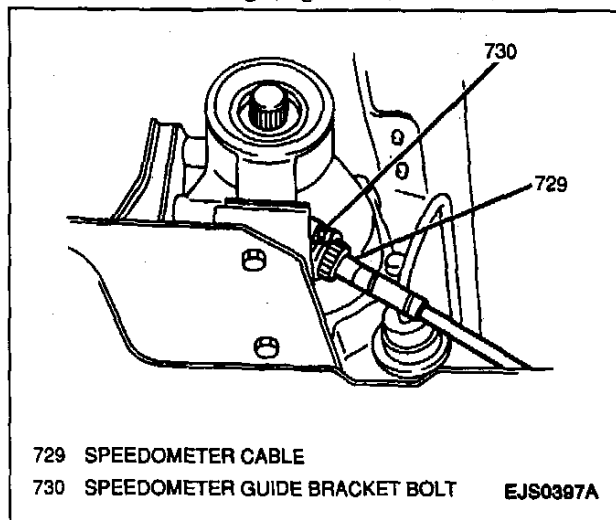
Speedometer Cable and Guide Bracket Bolt (3L30, 3-Speed)
